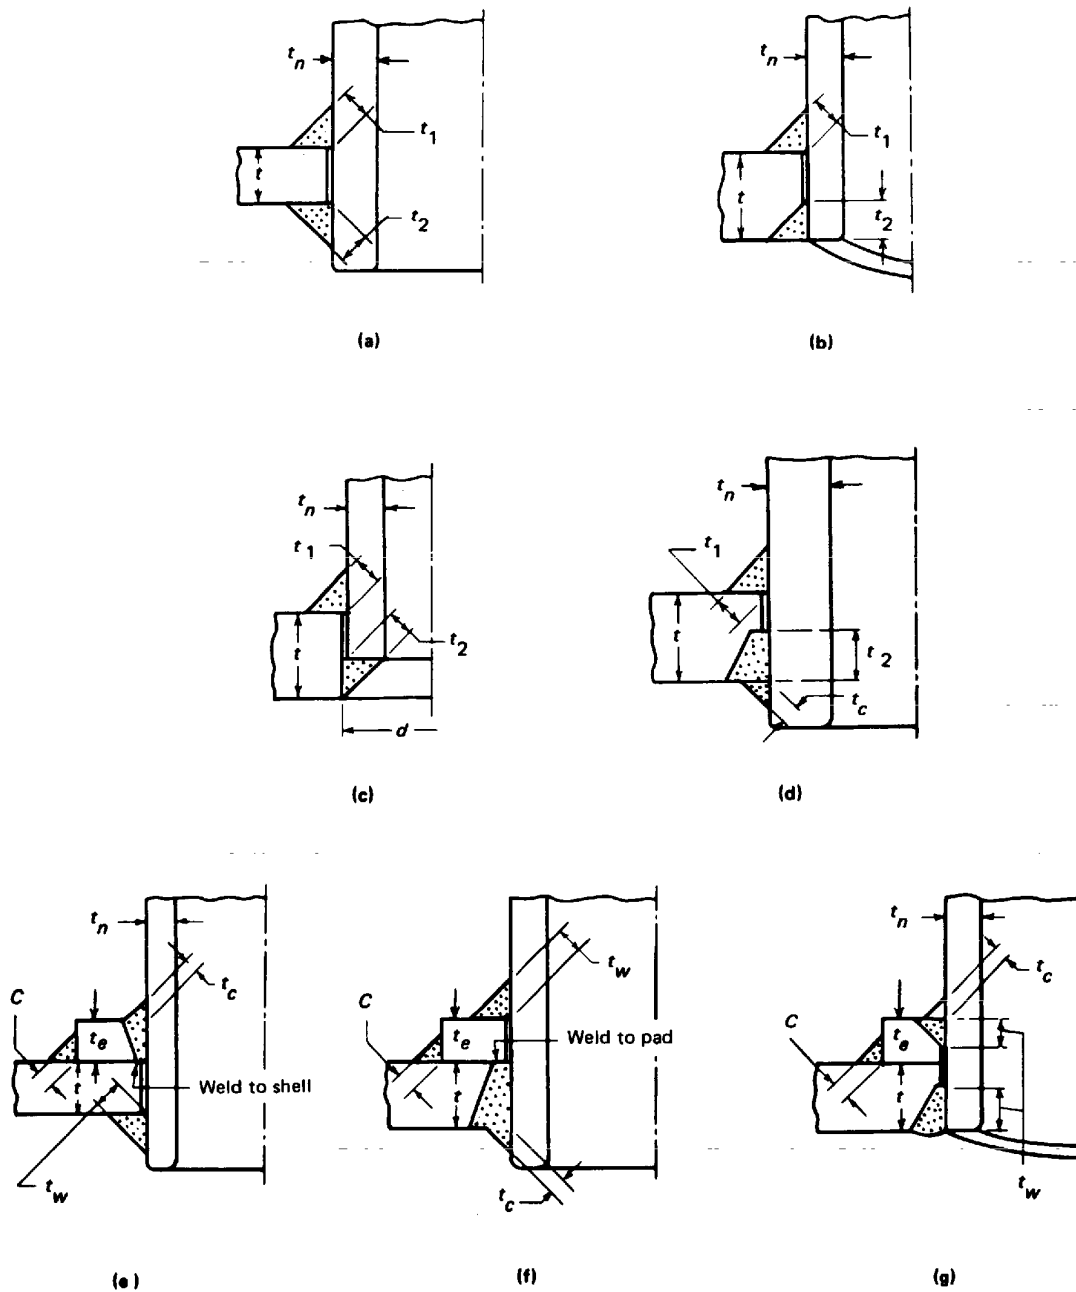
(d)-1 SOME ACCEPTABLE TYPES OF WELDED NOZZLES, AND BRANCH AND PIPING CONNECTIONS
